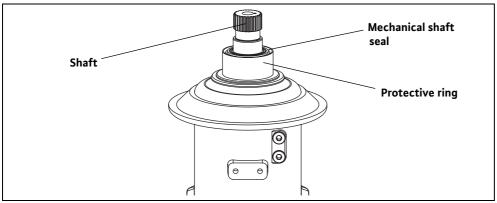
Pushing back the sliding seal, greasing the shaft
